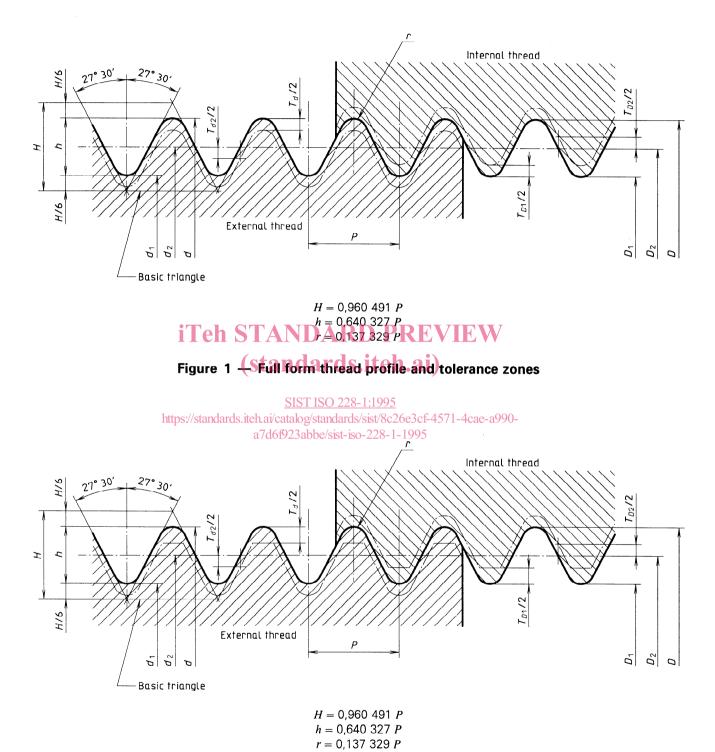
Truncated form thread profile and tolerance zones
